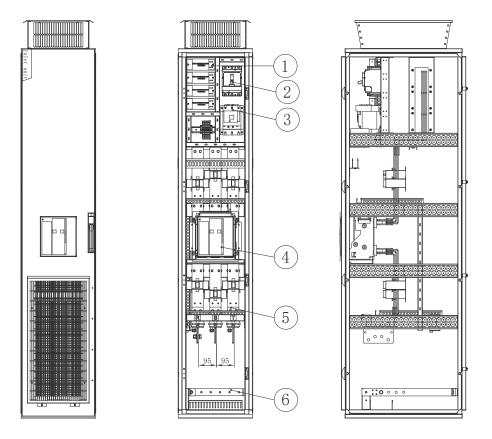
Frame Breaker Inlet Cabinet Unit Structural Layout Table 2-6 Frame Breaker Inlet Cabinet Unit Structural Layout Comments
